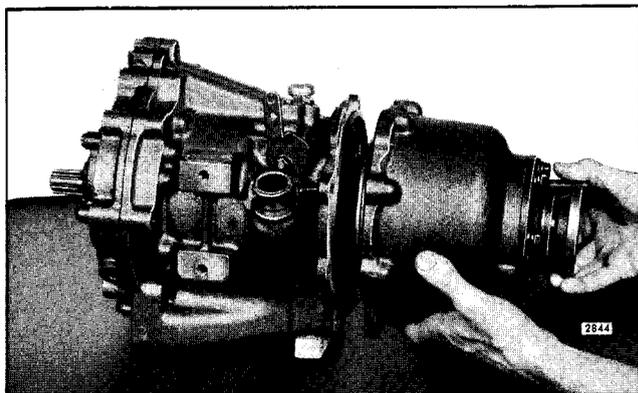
Removing or Installing Reduction Gear Assembly from/on Reverse Gear Assembly
